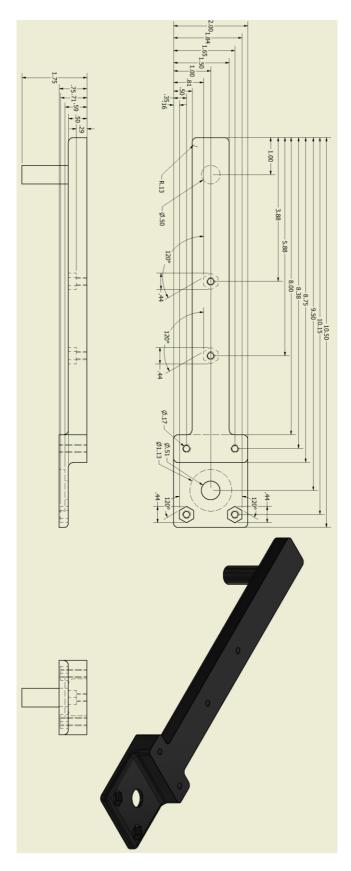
Arm Segment 1 Lower Half Mechanical Drawing (Units: in)
